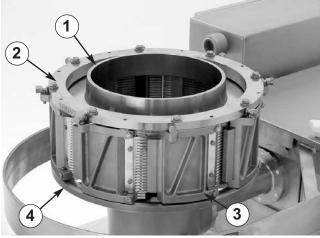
Cutting unit. (1) Impeller, (2) Cutting Head Assembly, (3) Shoe, (4) Cutting Head Support
